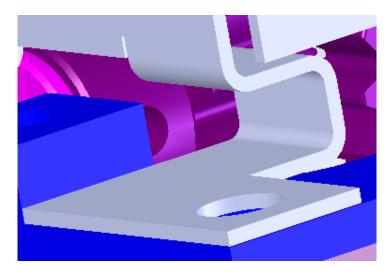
Third alignment between the sheet metal part and assembly, using a screw.
